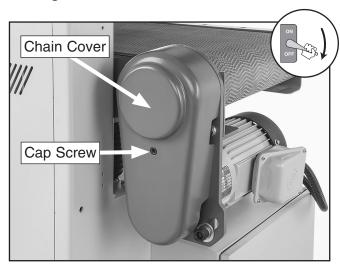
Chain cover and cap screw that must be removed to adjust the feed rate.
